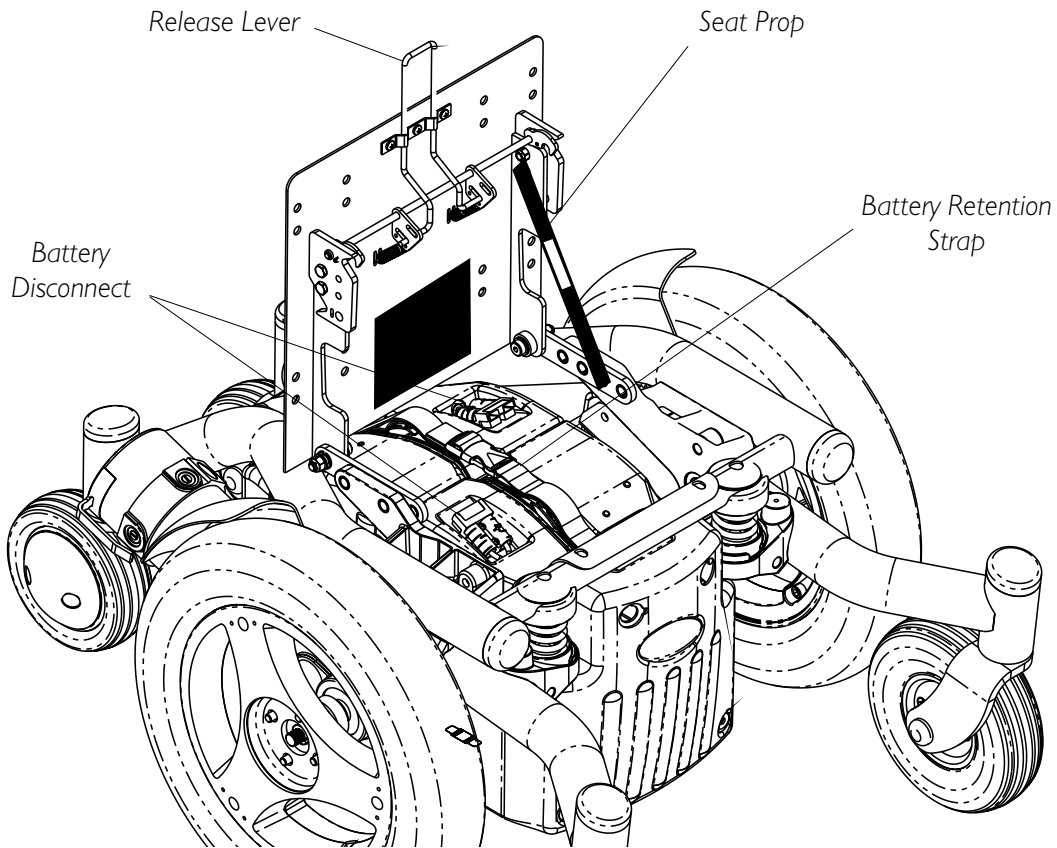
REMOVING/INSTALLING BATTERY ASSEMBLIES
